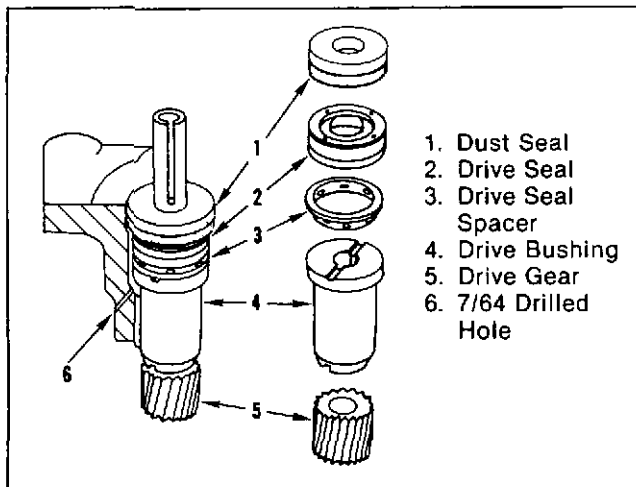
, (F5214). The tachometer drive parts in the housing.
